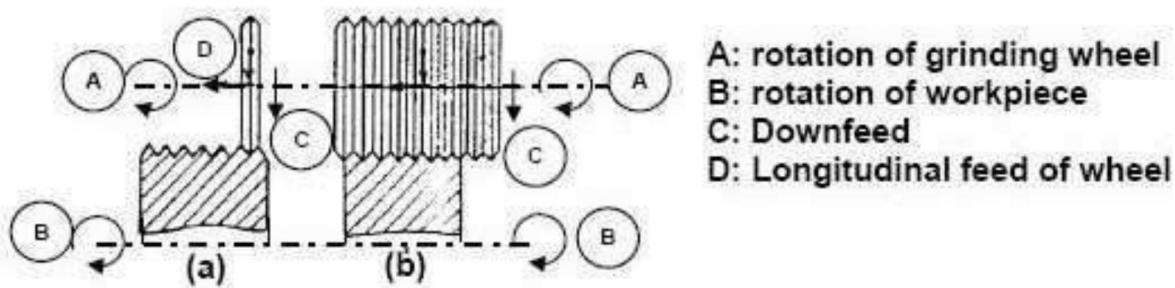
Thread grinding with (a) single rib (b) multi-ribbed wheel
